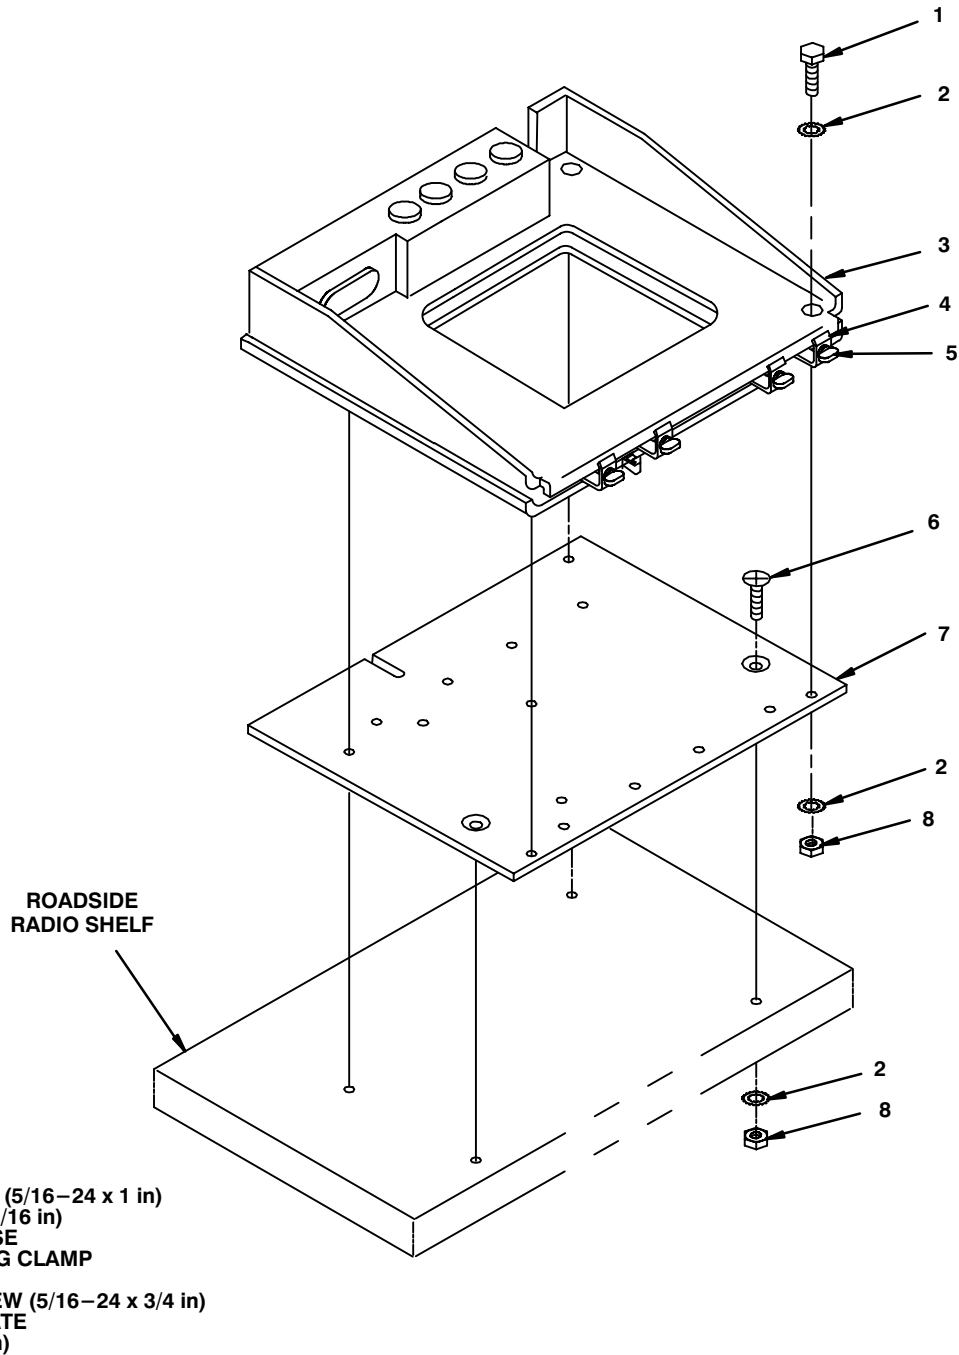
(2). Mounting Base Installation: Installing Mounting Base
